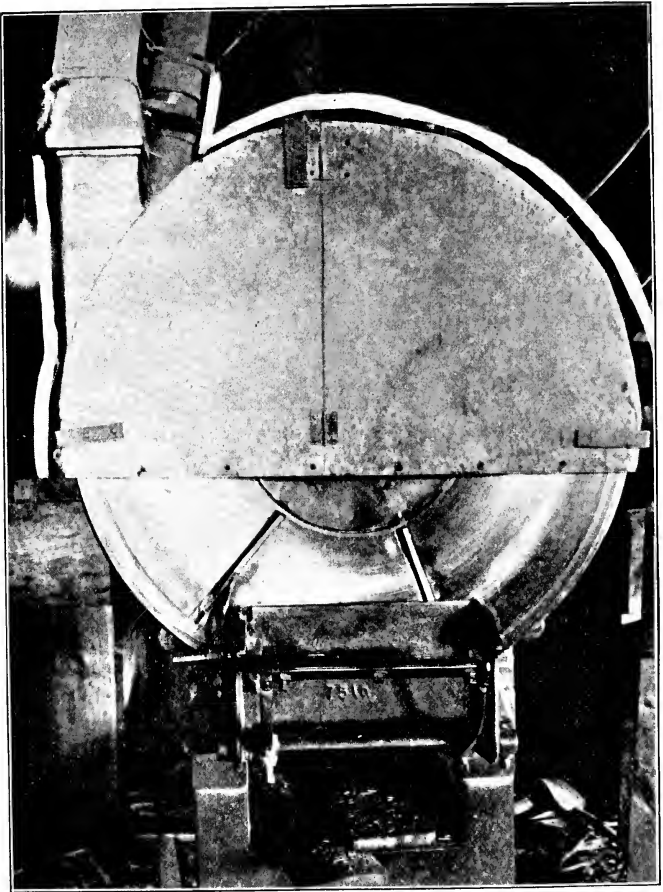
Illustration No. 26. Stave jointer with guard over cutters and equipped with exhaust system.
